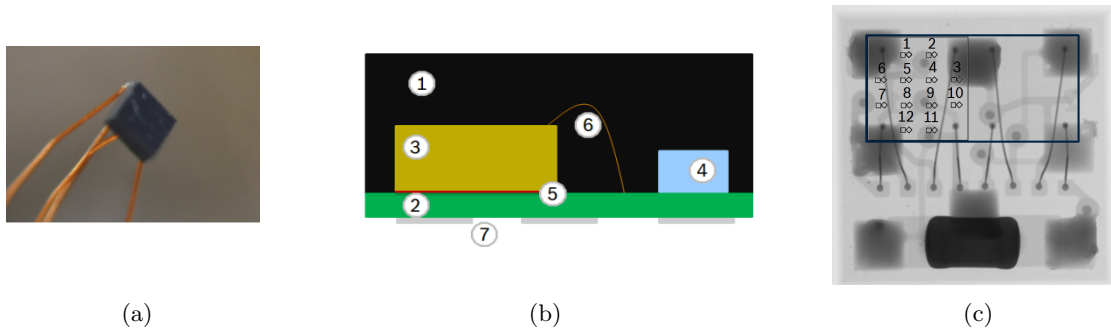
LGA package. (a) Image of an LGA package. (b) LGA package construction [(1) mold, (2) PCB, (3) stress sensor, (4) ceramic, (5) die attach, (6) wire bond, (7) soldering pads]. (c) X-ray of the package with the points of measurement marked.
